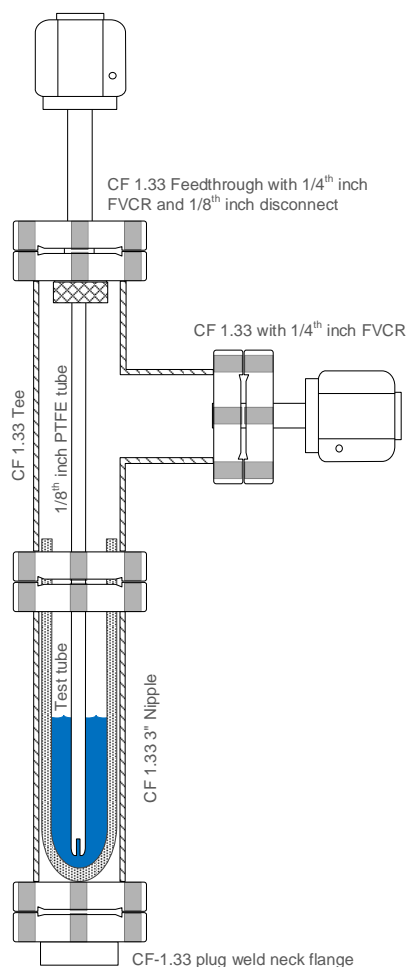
First-Generation CHS Bubbler Design. This figure shows the parts of the bubbler without the valves. The top assembly is a custom feedthrough with a 1/4" FVCR on one side of a 1.33 Conflat and 1/8" disconnect on the other side (inside the bubbler headspace, holding the PTFE straw). This bubbler design keeps the CHS liquid (shown in blue) in a borosilicate container (a test tube flame cut to length) with a PTFE straw, keeping any metal parts from contacting the liquid, to ensure long term storage stability of the CHS. Note that the test tube was cut to a length that ensured that it covered the Conflat seal of the upper and lower assemblies. This length of test tube prevents any condensed (or splashed from transport or impacts) CHS from contacting the copper ring gasket of the Conflat fitting before flowing back into the test tube.
